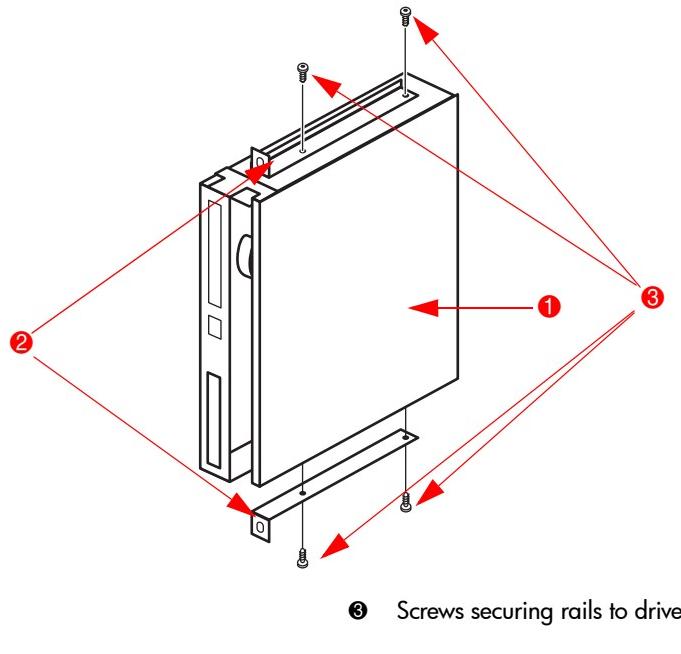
Remove the drive rails (the rail on the right side of the drive is shown)
